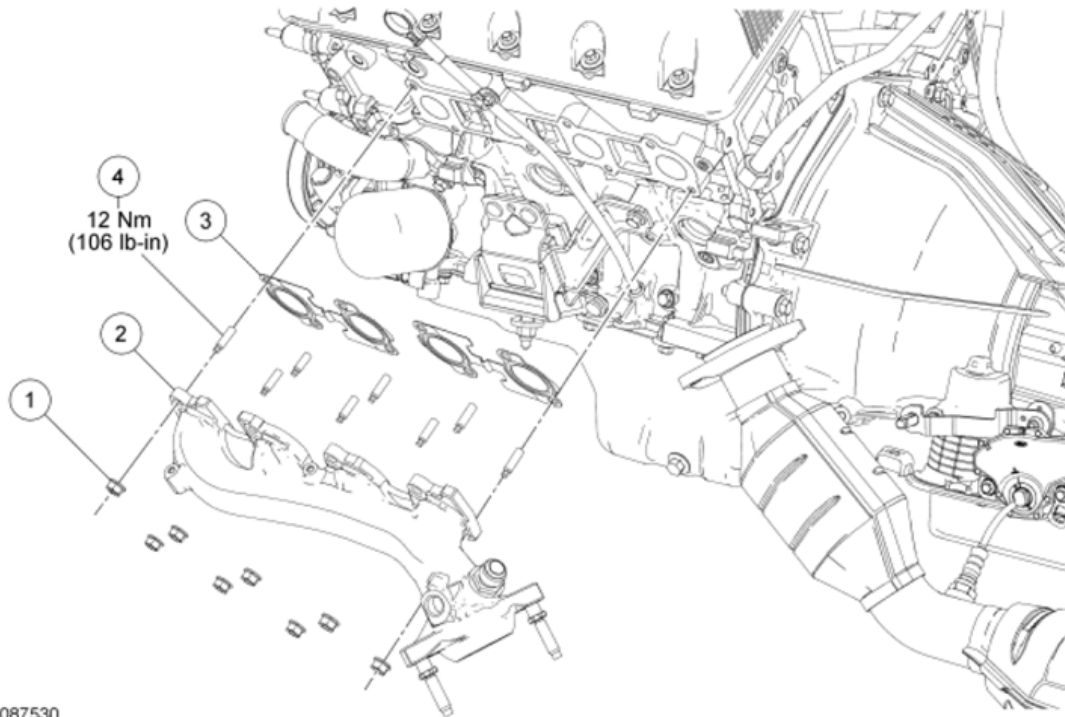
Identifying Exhaust Manifold Components With Torque Specifications - LH
